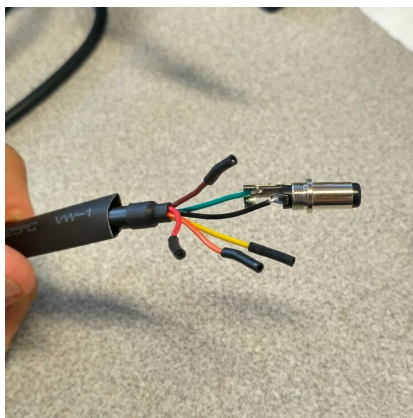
Open wires end of one cable. Black and green wires are soldered to a 2.5mm co-axial plug
